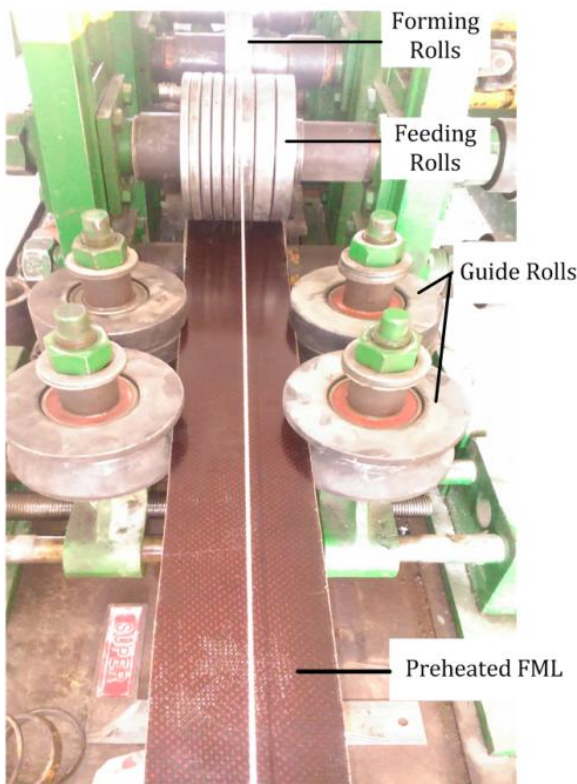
Roll forming experimental setup, and guide system of the strips
